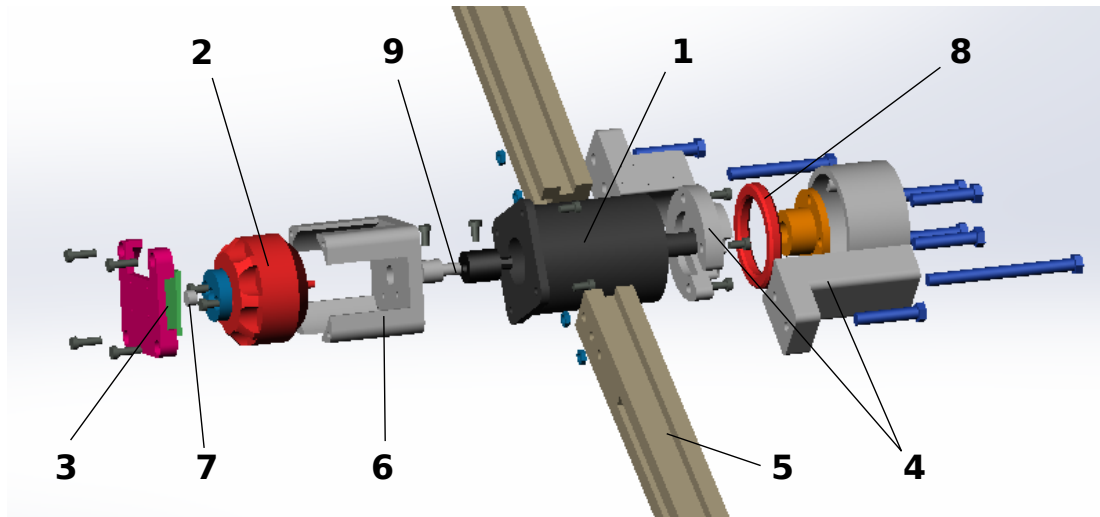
Exploded view of the servomotor where the main components are: 1) A low cost planetary gearbox. 2) A GARTT ML3510 600 KV BLDC motor. 3) A 14 bit magnetic encoder. 4) Link interfaces. 5) 20 by 20 aluminum link. 6) BLDC motor mounting with integrated heat sink. 7) Magnet mounting. 8) Ball bearing. 9) Motor-gearbox shaft interface.
